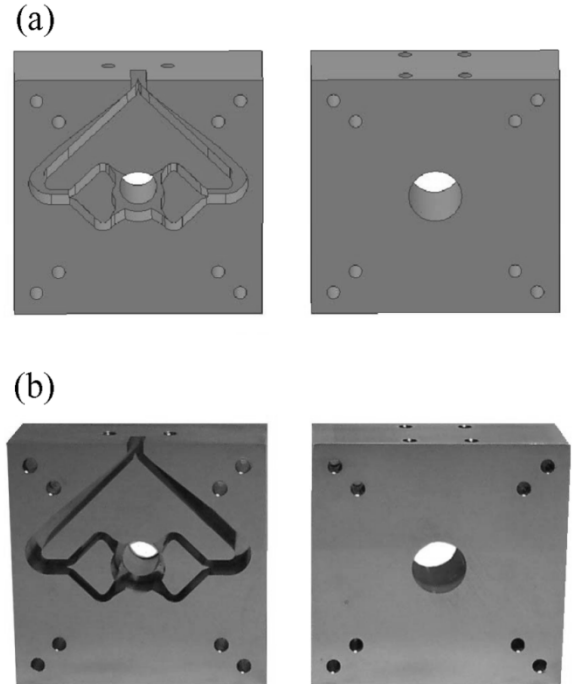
(a) Design drawings of the converter including a slotted plane (left) and plane cover (right). (b) The finished parts, which are made of OFHC copper.
